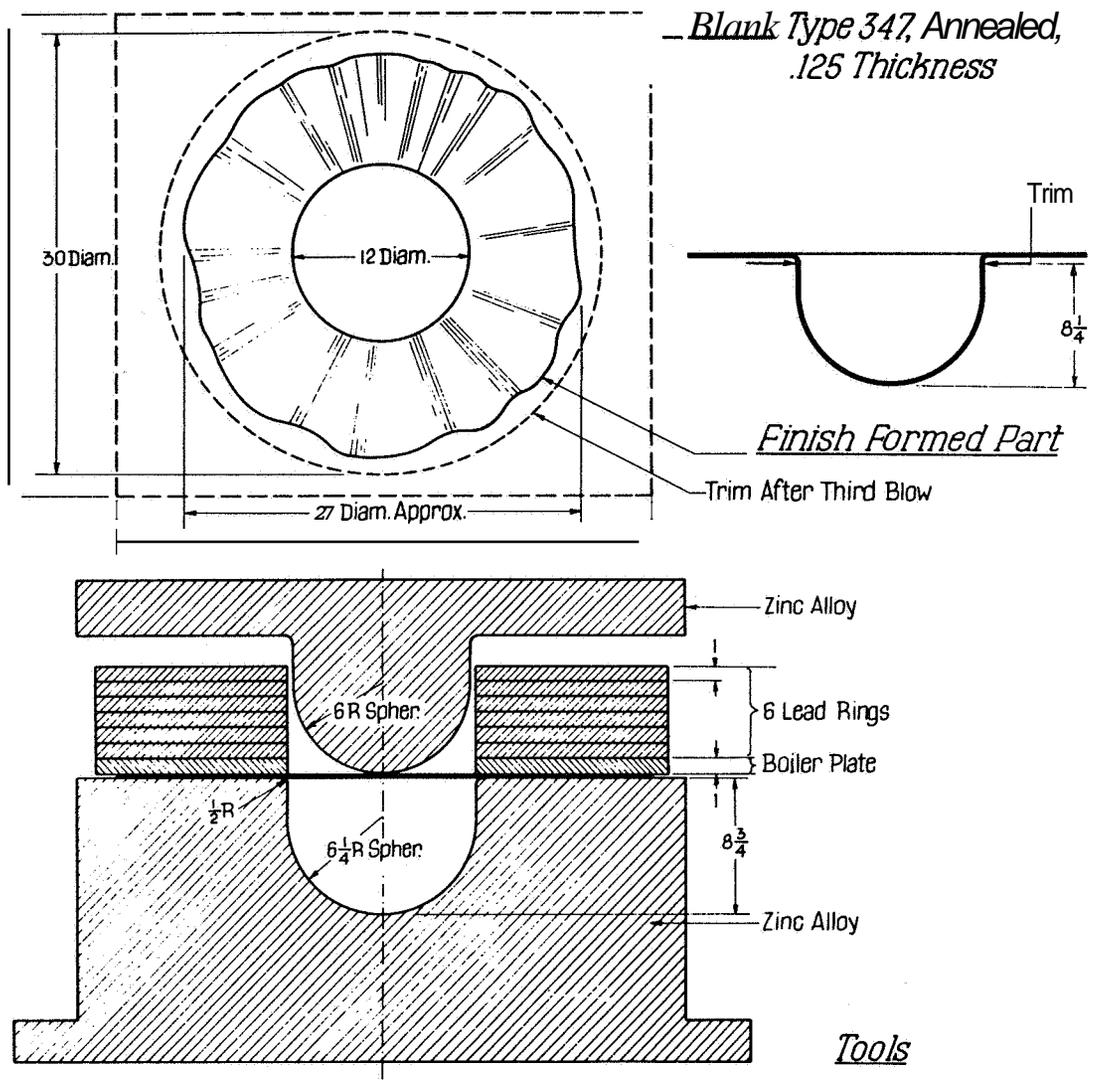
DROP-HAMMER FORMING A DOME-SHAPED PART (Ref. 78)
